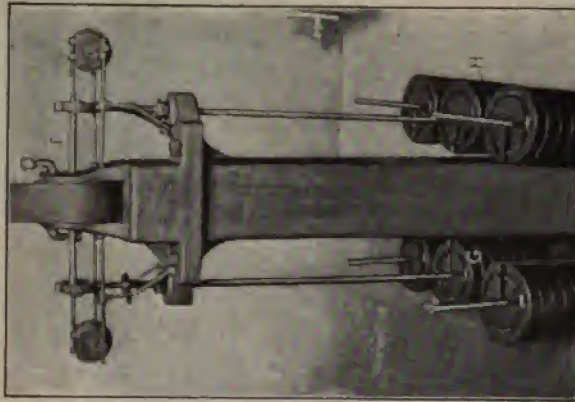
Testing Endurance of Titanium Steel in a White-Sinter Rotary Vibrational Testing Machine
